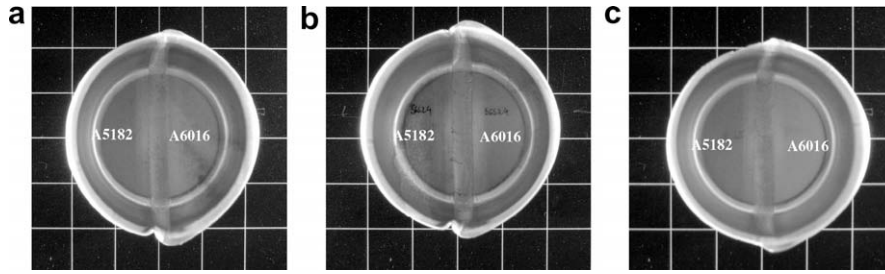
Cups from D56-D18 blanks drawn with 16 kN (a), 20 kN (b) and 32 kN (c) blank-holder forces.
